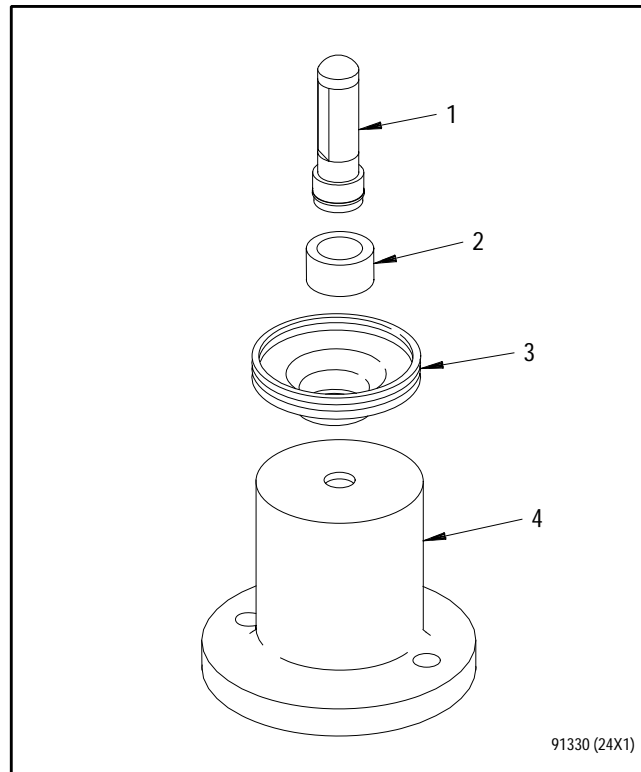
Gearbox Module Face Seal Assemblies - Assembly Tooling
